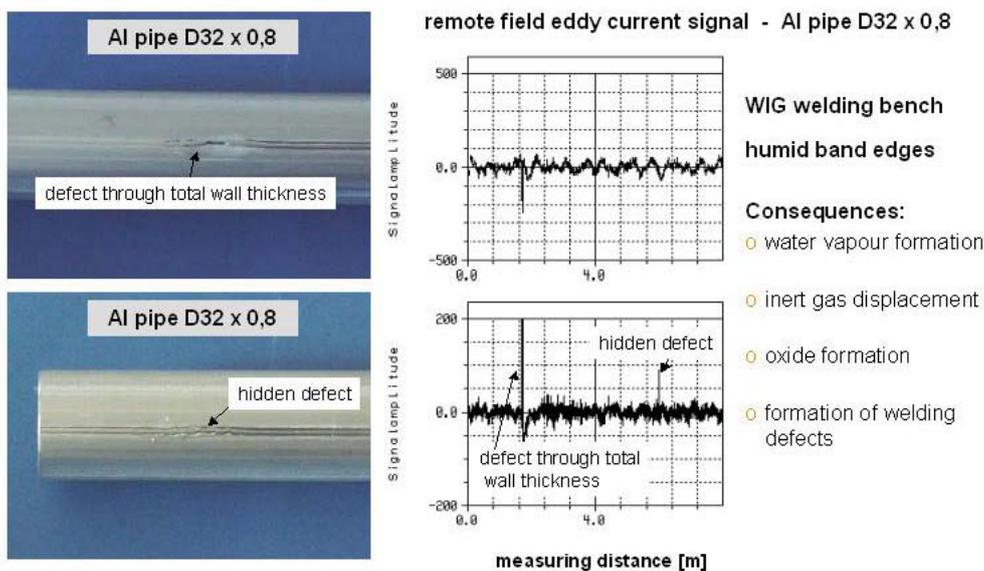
Exemplary view and measuring signal of a defect weld seam caused by humid band edges
